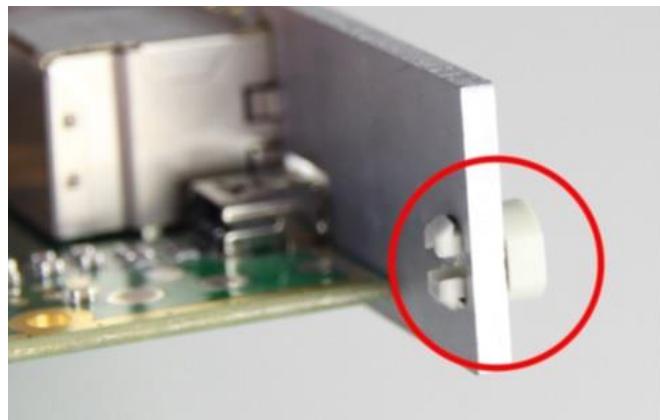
Safety Nipple on Front Panel of 21-Card Chassis
